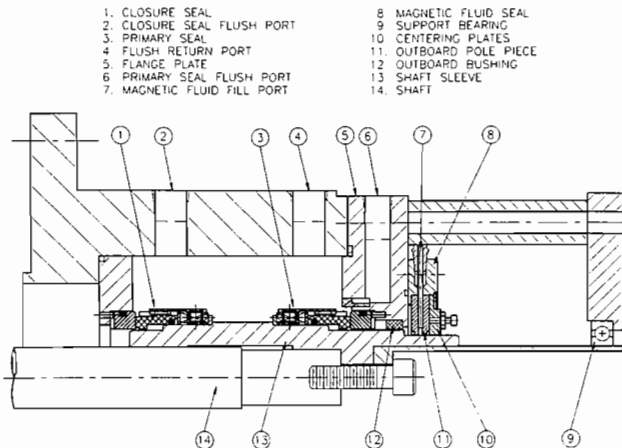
Lab Test Arrangement Simulating Initial Field Installation of the Magnetic Fluid Seal.
